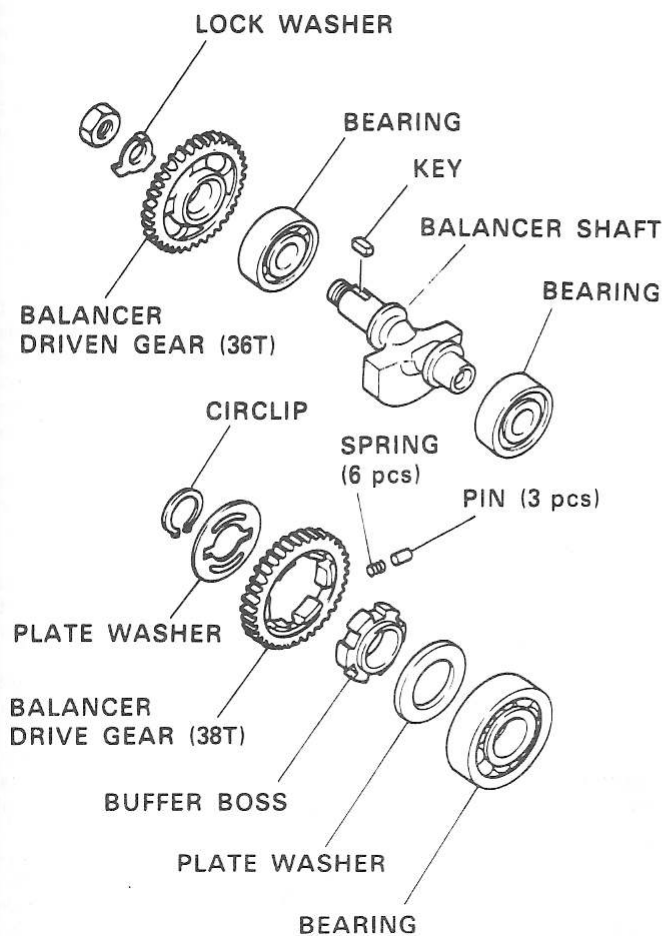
B.44 Balancer shaft/gear components — exploded view (Sec 24)
